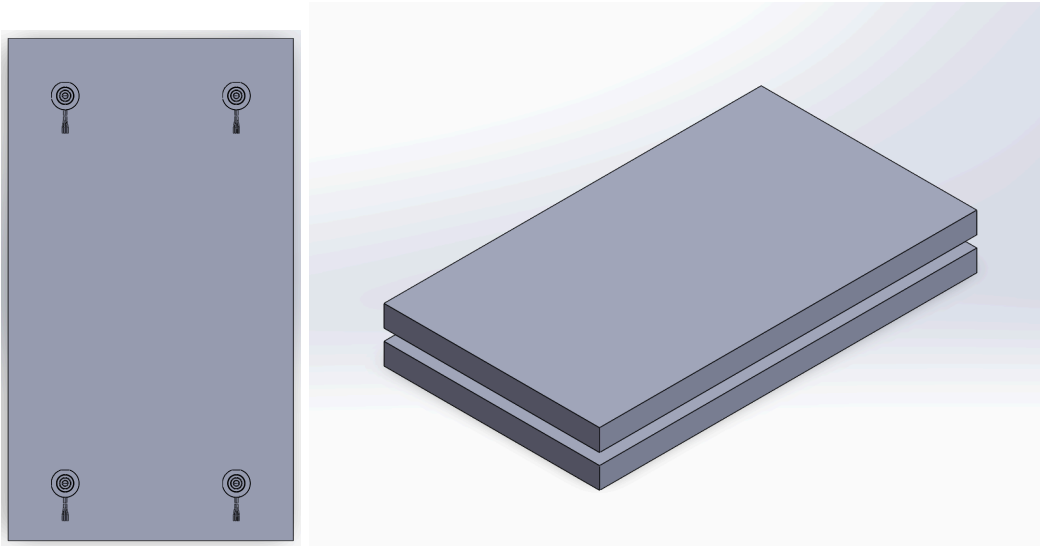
CAD Model of bottom plate with load cells and isometric assembly
